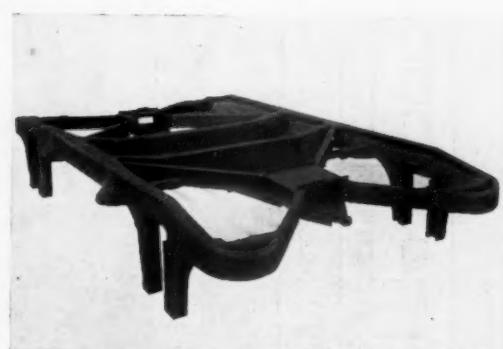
Welded steel bogie frame of tubular construction
